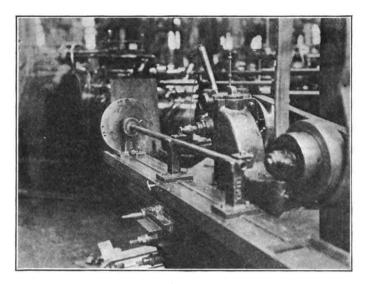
Hand miller with fixture for cam-shaft keyways.
